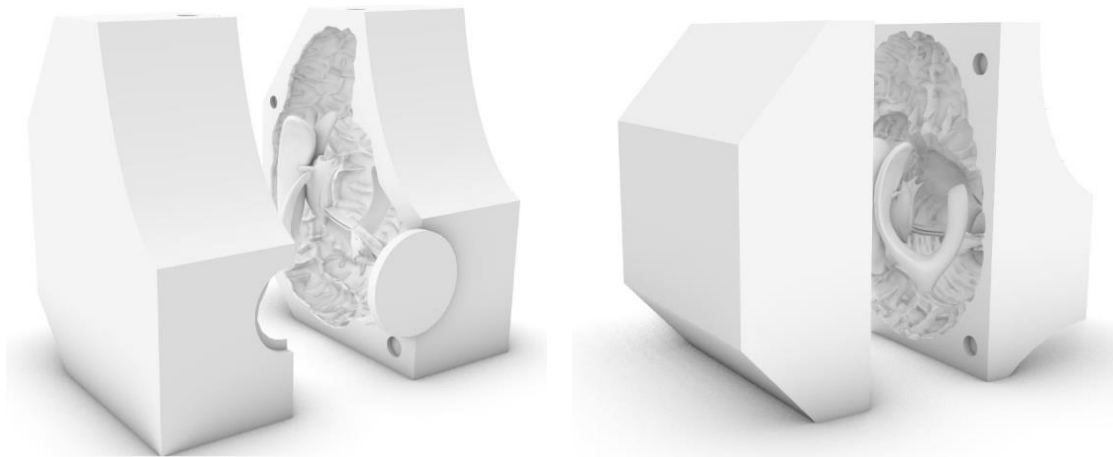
VENTRICLES IN THE MOULDS. MOULD A ON LEFT AND MOULD B ON THE RIGHT
